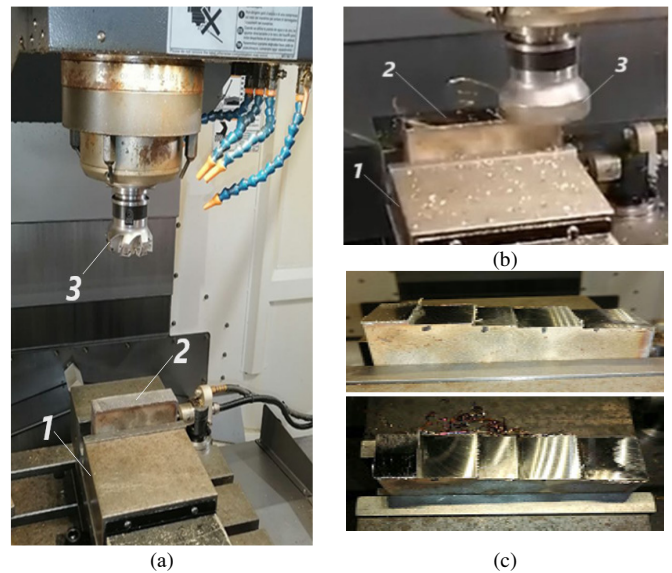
HSM processes of VT1-10 titanium alloy: (a) setup of the V-Center P76 machining center, (b) HSM process, (c) titanium sample surfaces machined under different cutting conditions.
